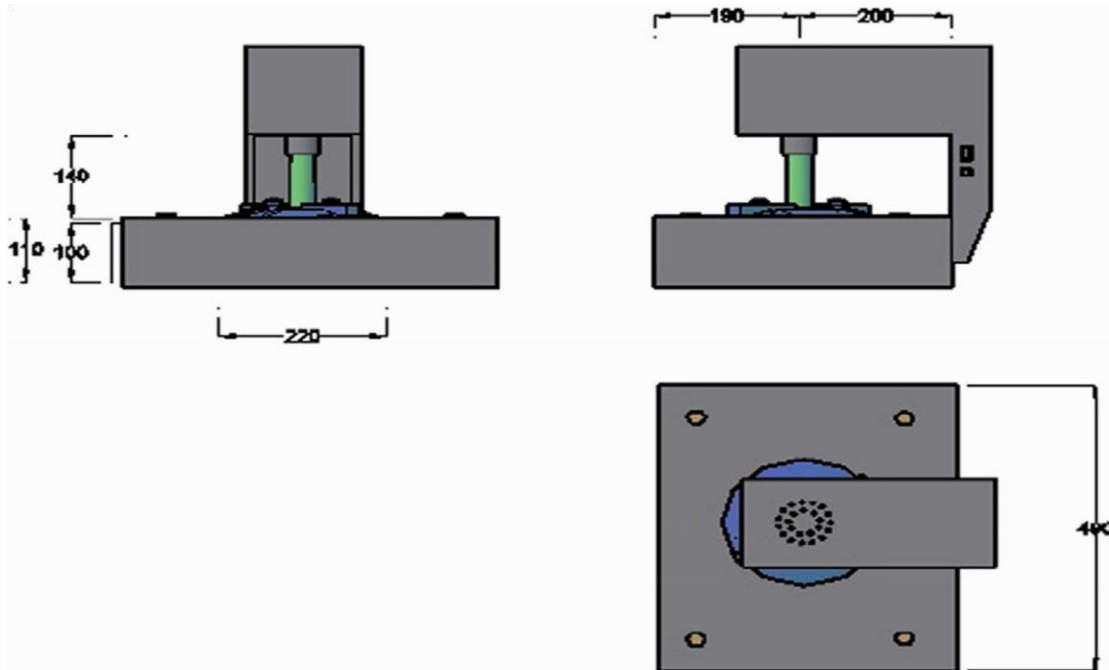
orthographic view of the machine by Ajay and Makinde
